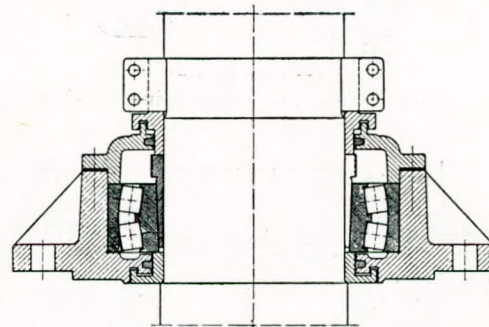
Double-row self-aligning roller bearings for rudder stock.
